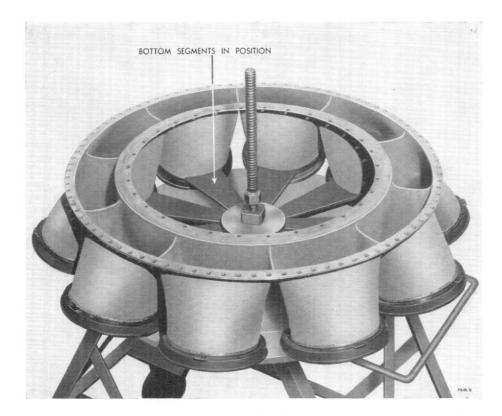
Discharge nozzle mounted on welding jig with bottom segments in position.
